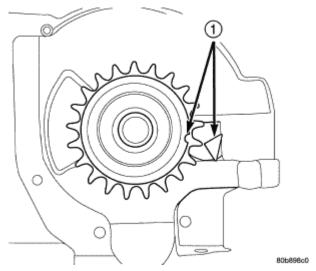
View Of Crankshaft Positioned At 60 DEGREES ATDC No. 1
